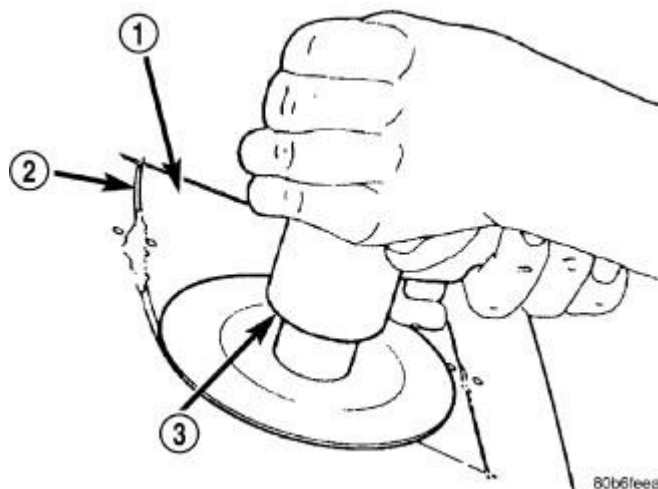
Applying Alignment Index Marks To Rear Axle Flange
